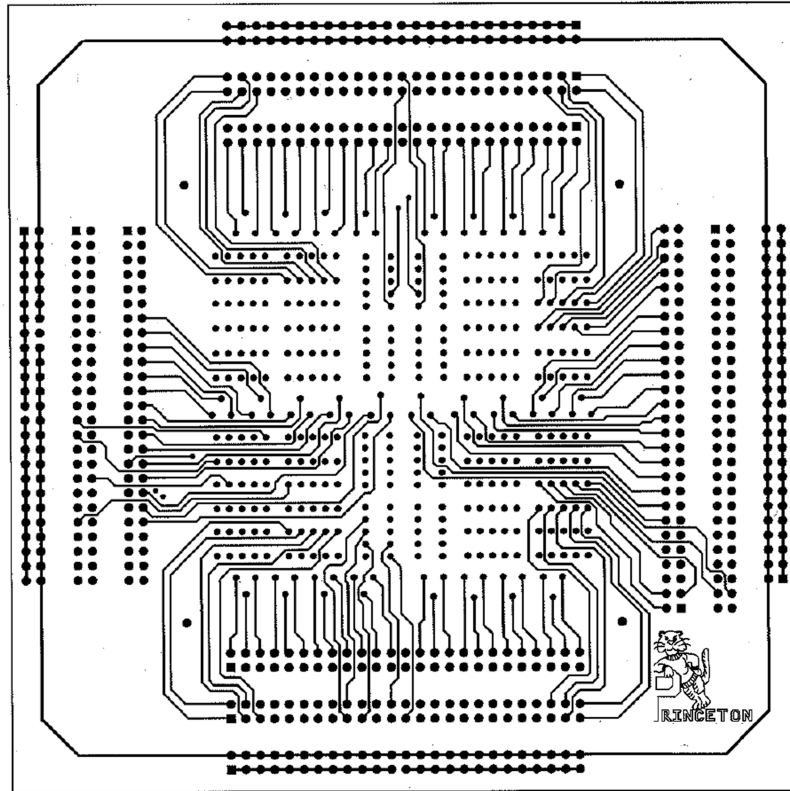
(d) highlights the next level of integration experiments. We have developed a pin array that enables testing of all devices and circuits of a sample. This array consists of 400 spring loaded pins [74] soldered through-hole on a printed circuit board. These are distributed over a 7.5x7.5cm area in a predetermined pattern, which matches the pattern on the substrate with thin-film circuits, and routed to external headers. The pins are manually compressed onto the substrate through the use of the four pictured screws/nuts. When interfaced with external data acquisition boards, the pin array subsequently allows us to programmatically test and interconnect a large number of working circuits and devices, to then integrate several functions. With this setup, we have demonstrated circuits with simultaneous operation of over 250 TFTs on glass.
